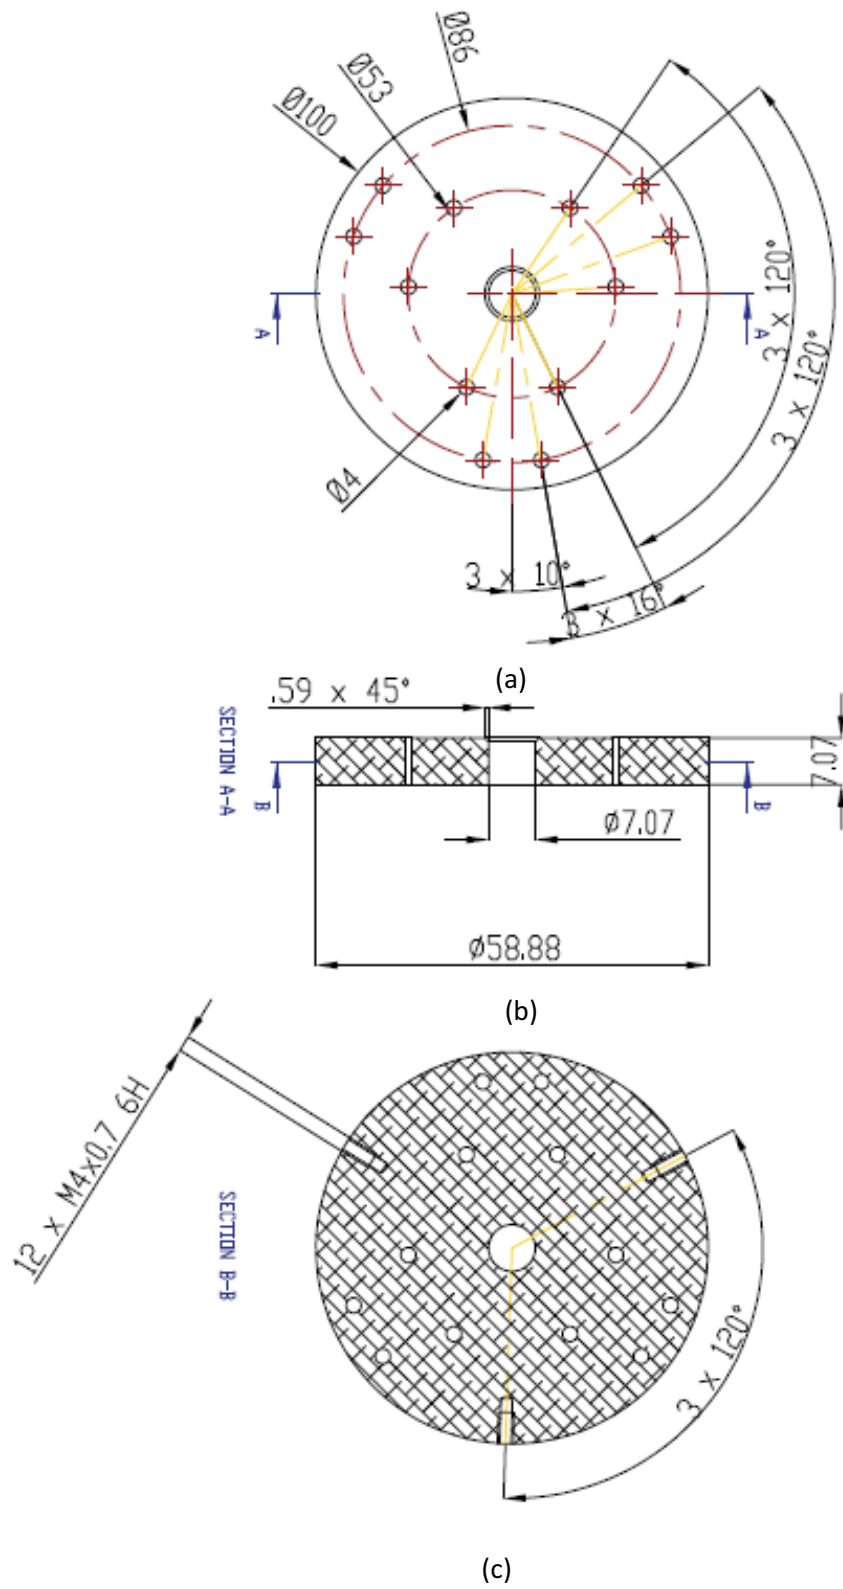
Wind turbine hub (a) front view (b) section view A-A(c) section view B-B.
